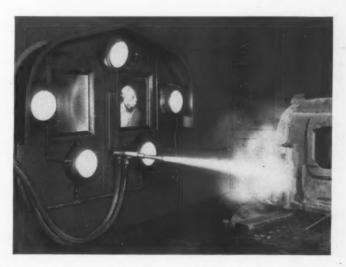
Hydraulic blasting method of cleaning large castings of adhering sand prevents escape of much dust.
